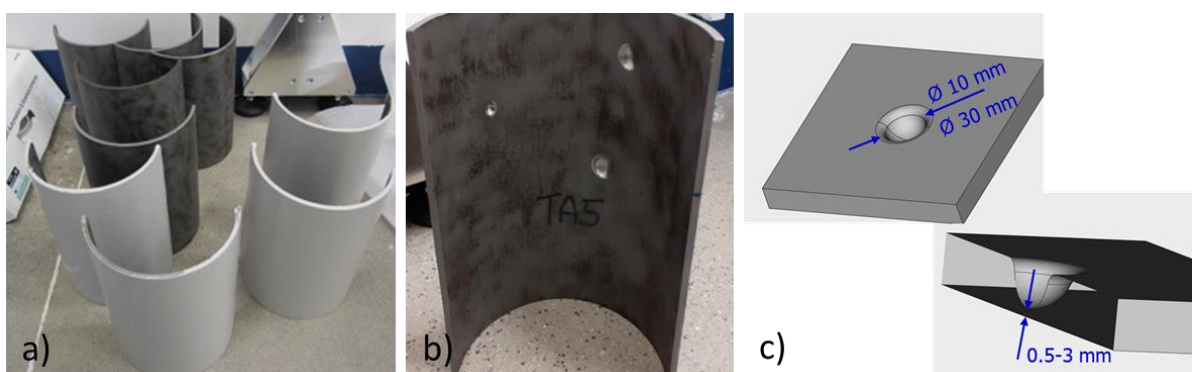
Experimental painted and unpainted steel samples (a), defects on the inner side of a samples (b), drawing of the spherical type defect (c).
